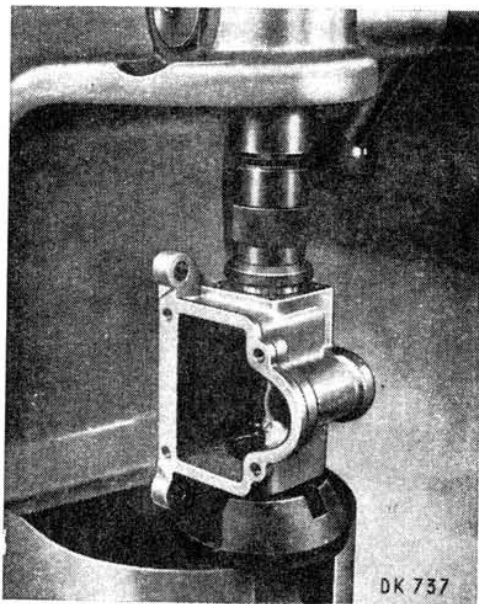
/1 - Pressing-in Bottom Bearing on MP 7-102 Jig (support plate) Using MP 7-103 Pressing Mandrel
